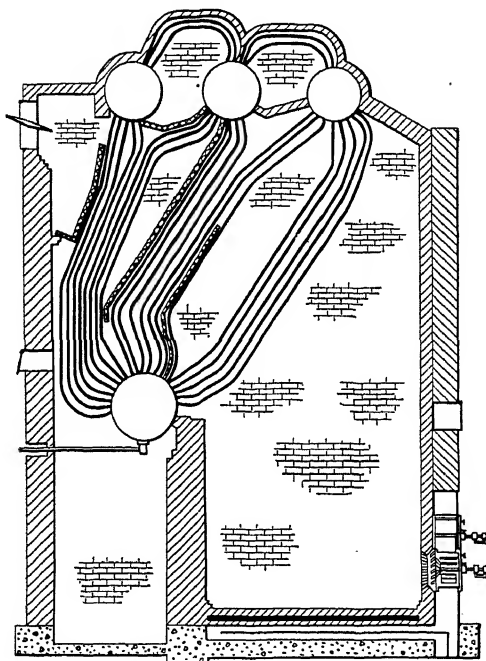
Stirling boiler, oil-fired, under forced draft with mechanical pressure-atomizing burners.
